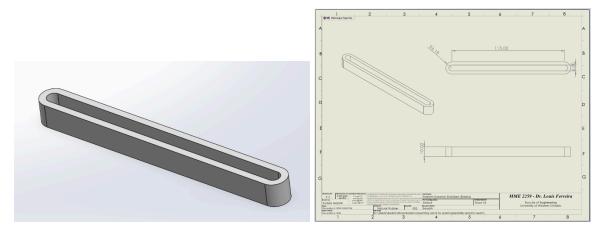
Forearm Dynamic Stabilizers CAD and CAD Drawing
